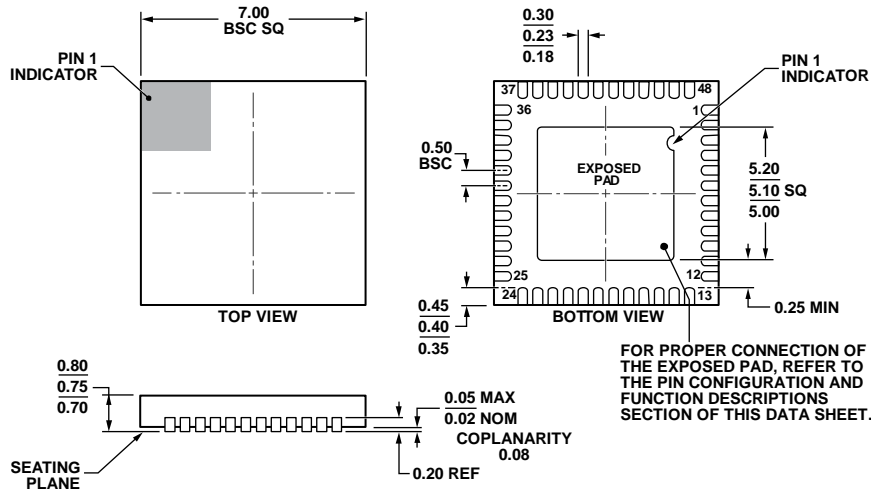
48-Lead Lead Frame Chip Scale Package [LFCSP]
